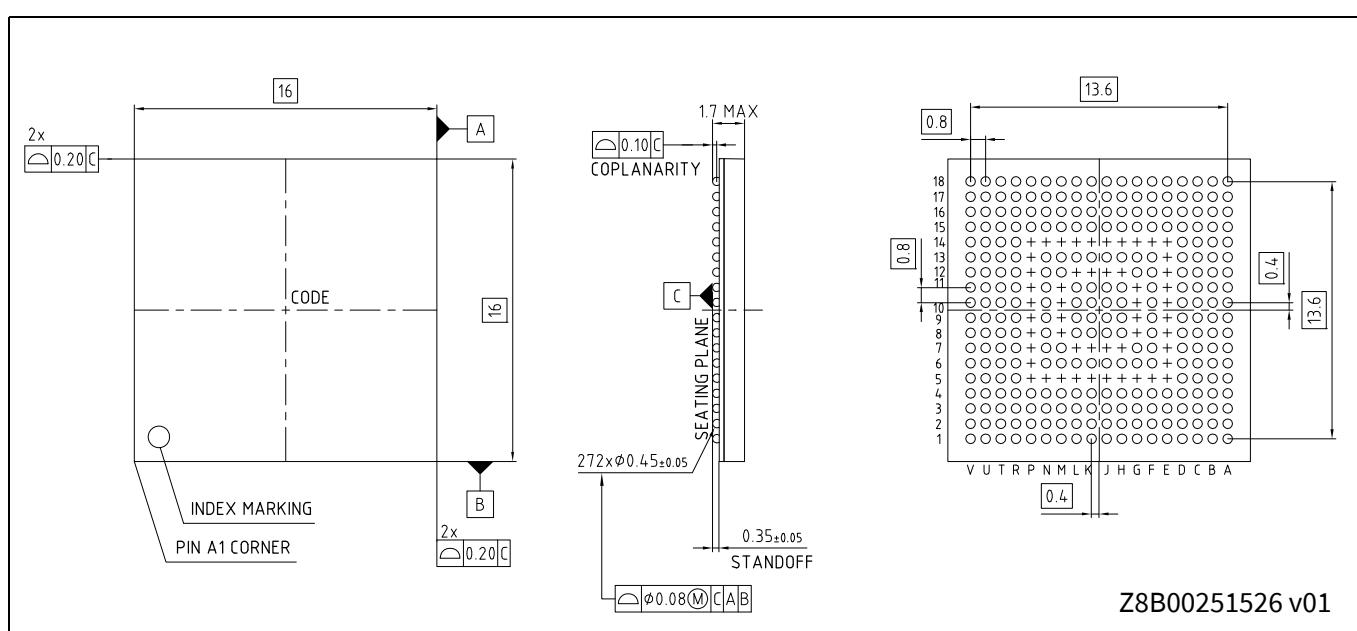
272-ball FBGA (16 × 16 × 1.70 mm) LBM272 (PG-LFBGA-272), package outline
